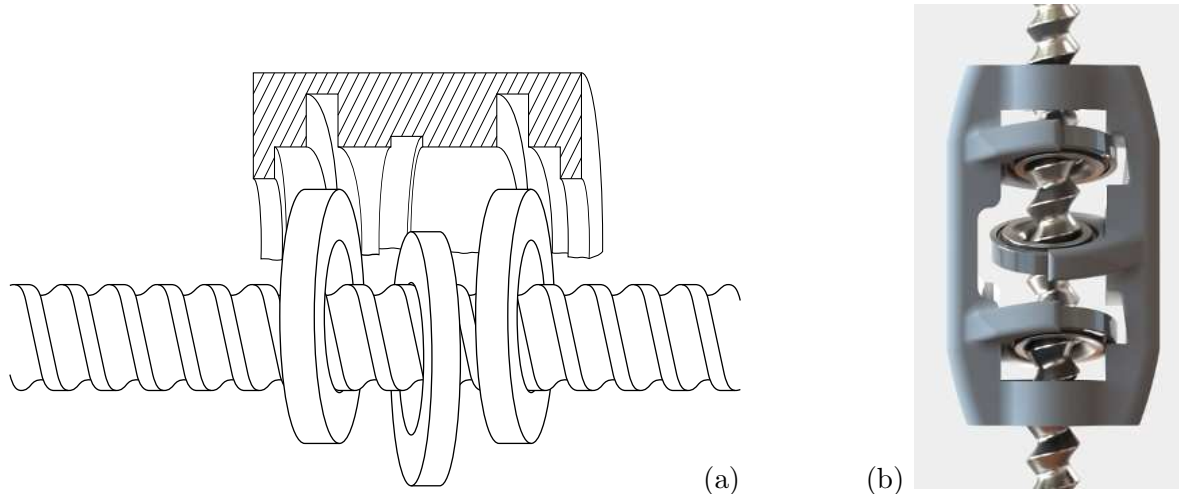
Ring screw mechanism sketch (a) and CAD rendering (b), the latter by E. Heijmink
